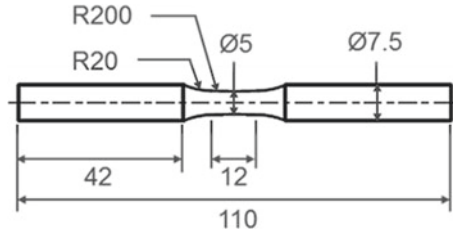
Technical drawing of specimen geometry in tensile testing and fatigue testing up to 20 Hz [16]
